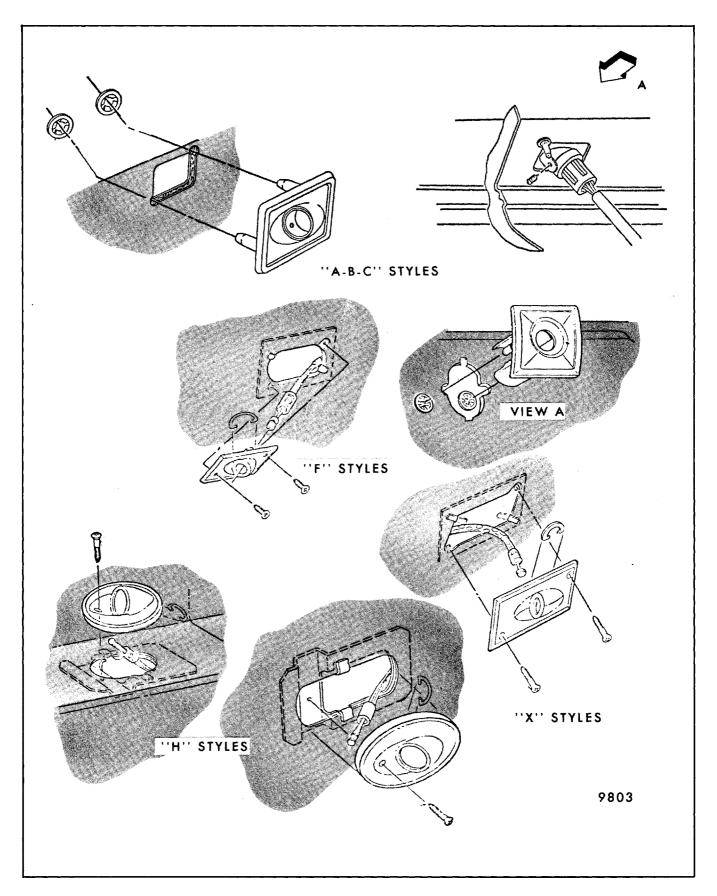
Typical Remote Mirror Cable and Escutcheon Attachment
